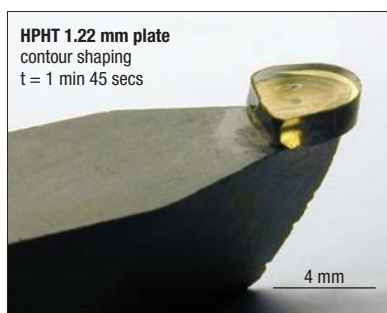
HPHT monocrystalline diamond-laser shaped tool-tip
